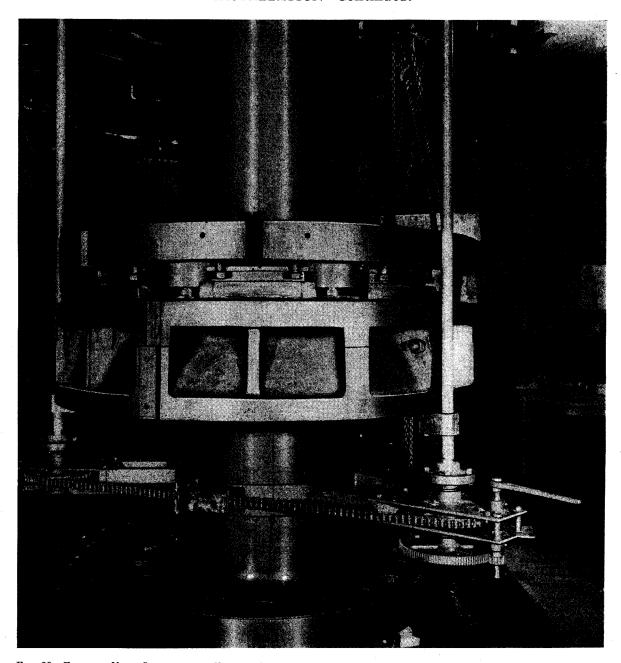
Factory View Showing the Thrust Bearing Assembly of an Umbrella Generator in the Lowered Position. Also Illustrates the use of the Special Thrust Bearing Lowering Device.
